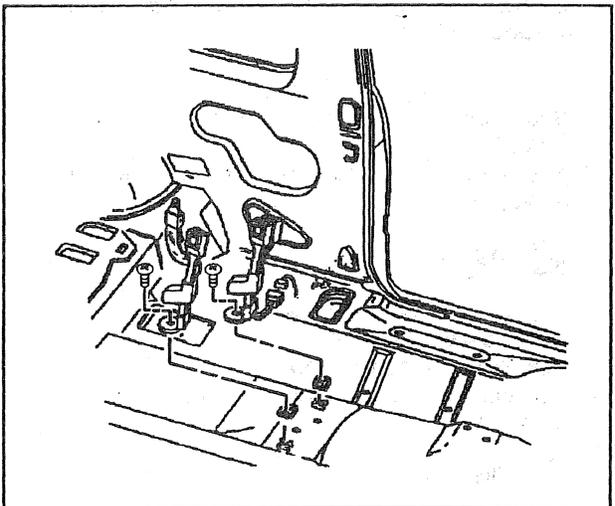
Front Seat Belts (Regular Cab with Bench Seats)
